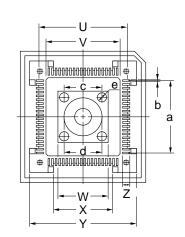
Package Drawings of TGK-080SDW (Reference) (unit: mm)
